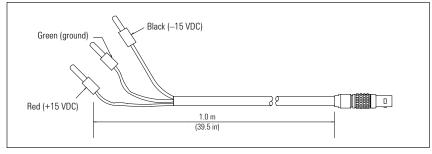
Mechanical dimension for cable option with banana plugs (87405C-101)
